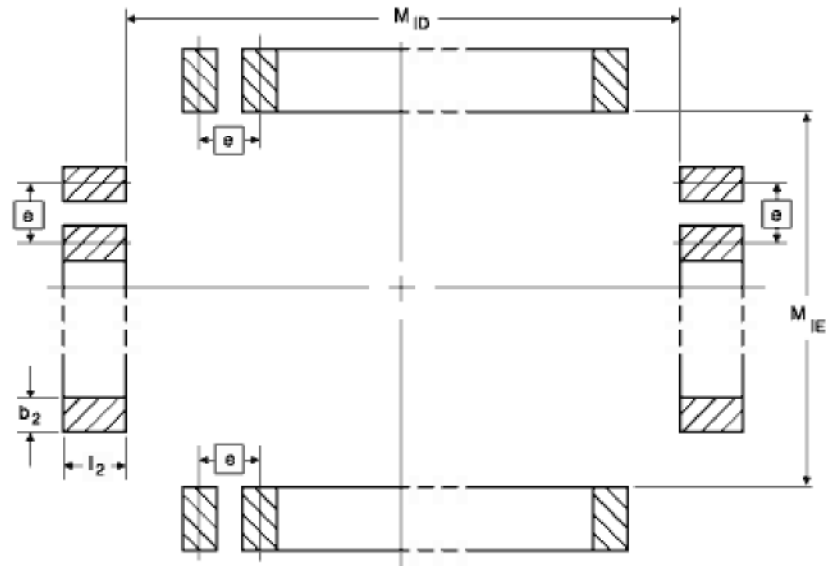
EIA Standard Board Layout of Soldered Pads for QFP Packages
